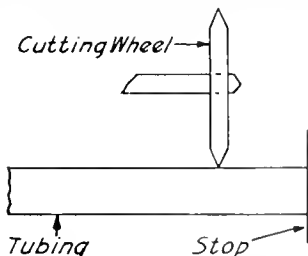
Tubing for Lamp Stems Being Cut to Proper Length by Emery Wheel
